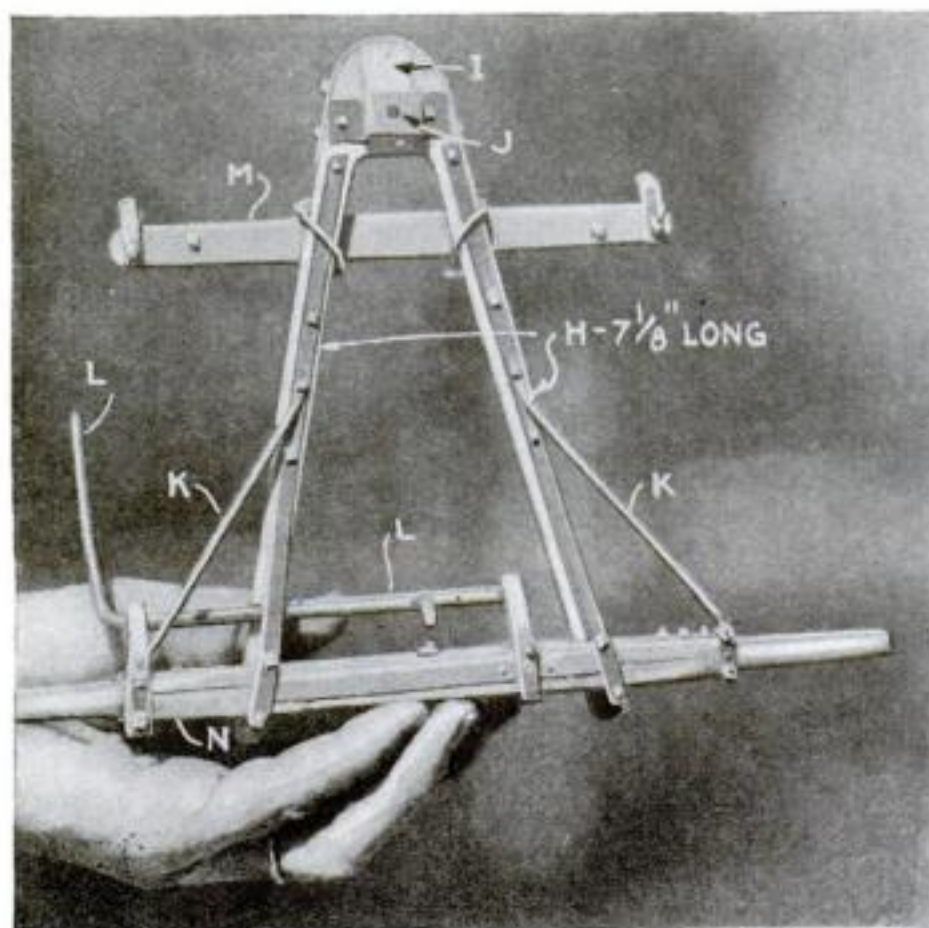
Bottom view of the hind hounds *H* and rear axle *N* assembly. The rear bolster *C* is not shown, since it is entirely hidden by the axle *N*.
